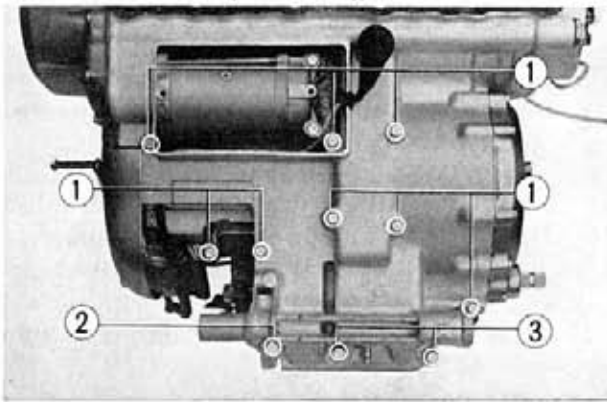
① 6mm bolts ③ 8mm bolts
